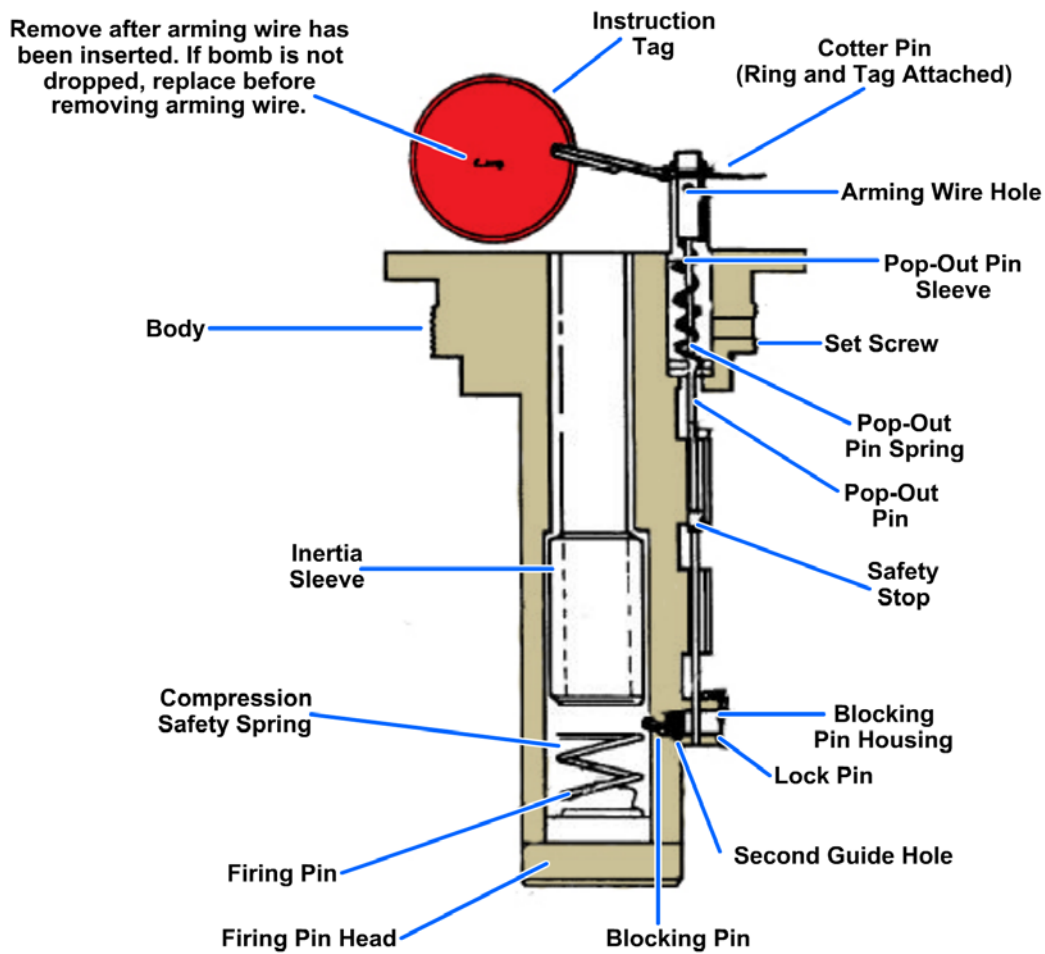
Mk 89 Mod 0 bomb-spotting charge adapter.
